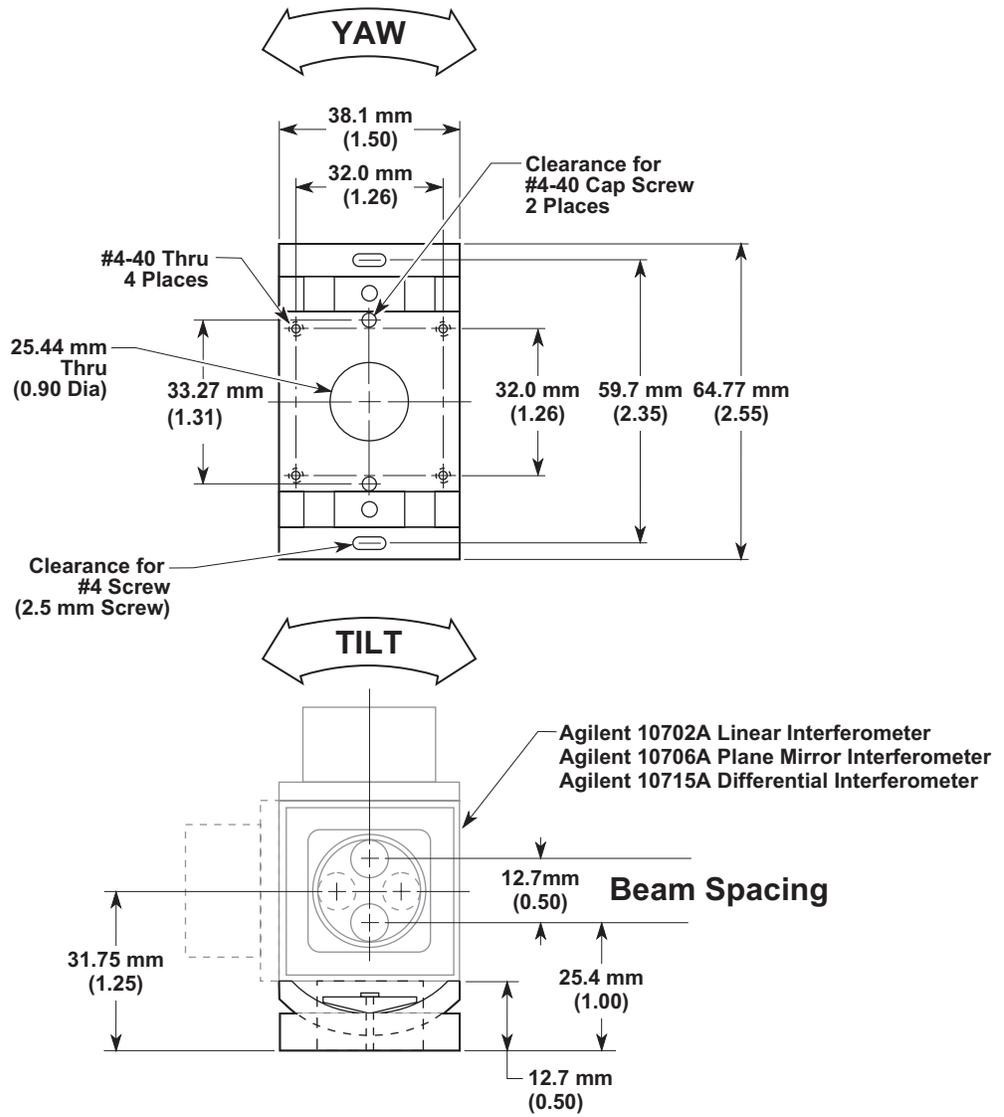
Agilent 10711A Adjustable Mount — dimensions
